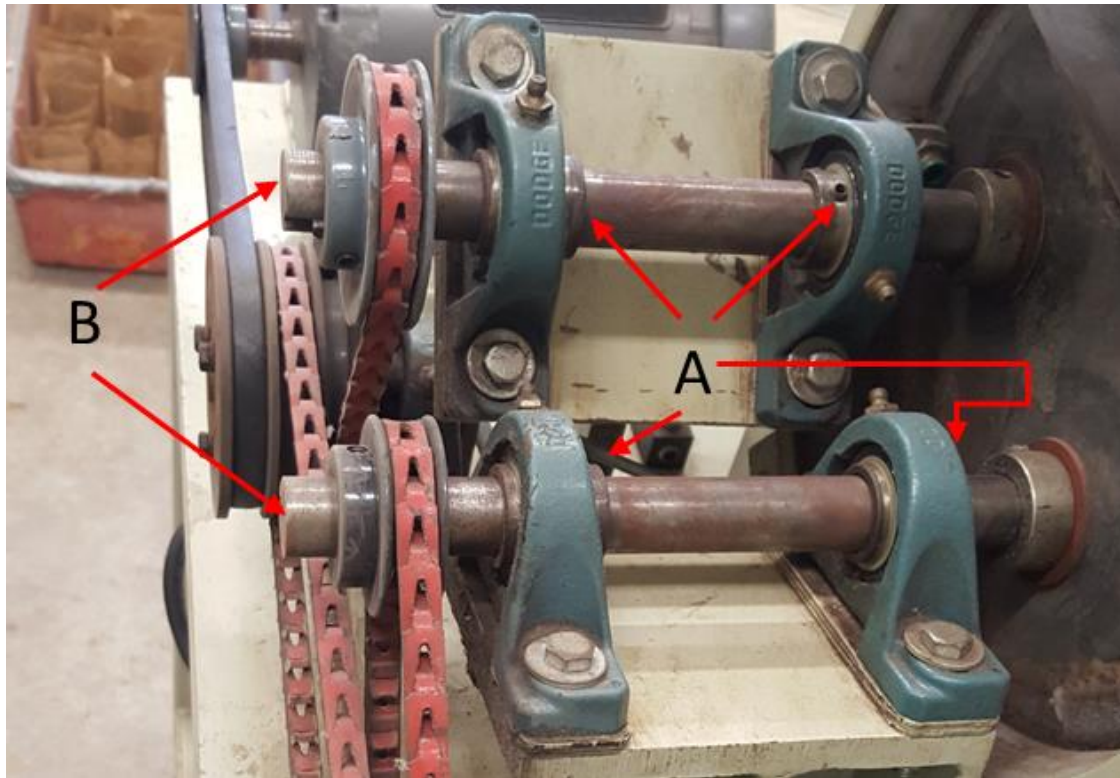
Image of mechanical cottonseed delinter power transmission system and components requiring removal to change brushes. A.) Set screws on Bearings; B.) End of shafts.
